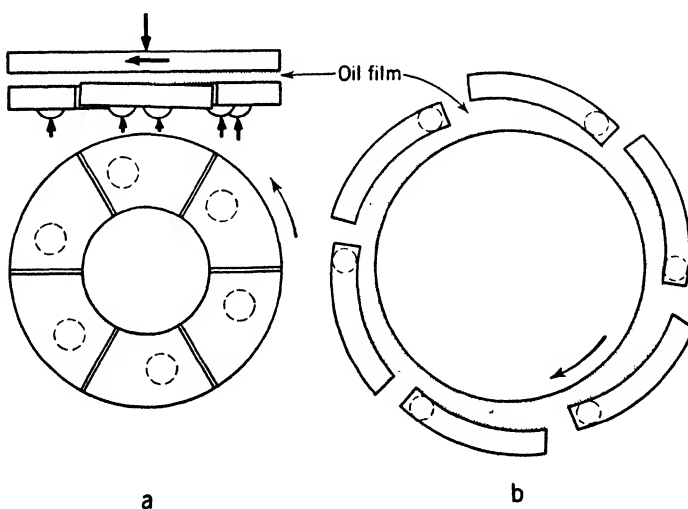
Schematic drawing of (a) segmental thrust bearing and (b) segmental journal bearing.
